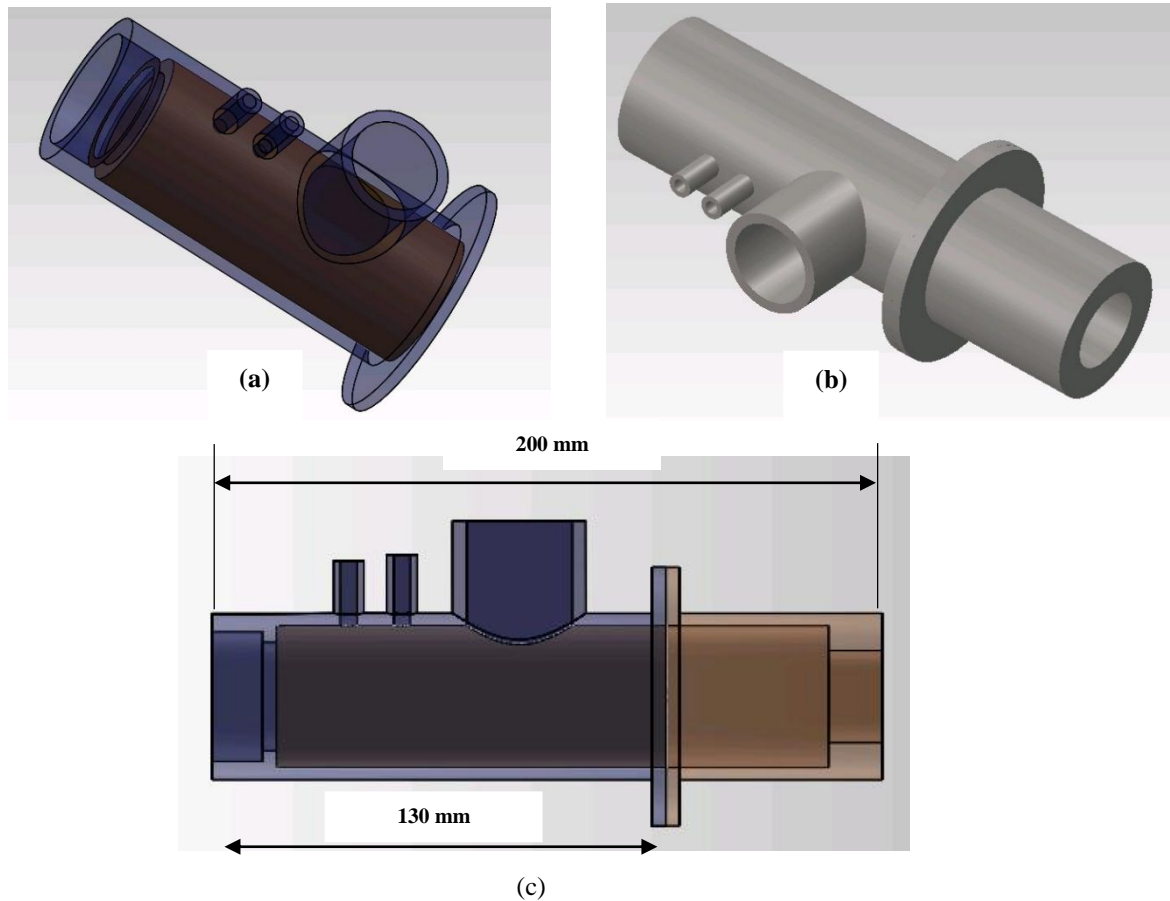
(a) Inlet housing part 1; (b) Complete assembly of inlet housing; (c) Specification of inlet housing.
